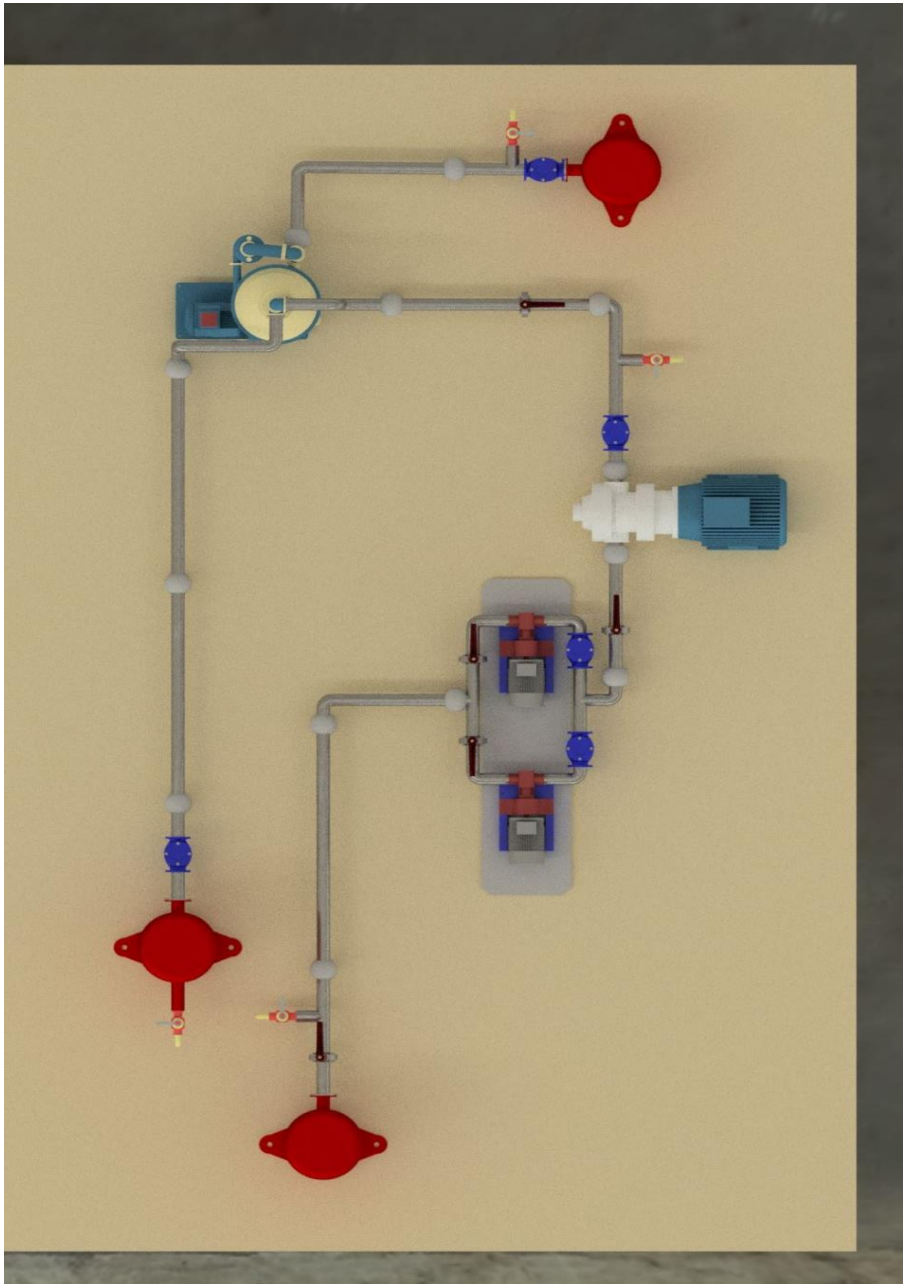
27.3D Model of KCB Series Gear Pump (1)
